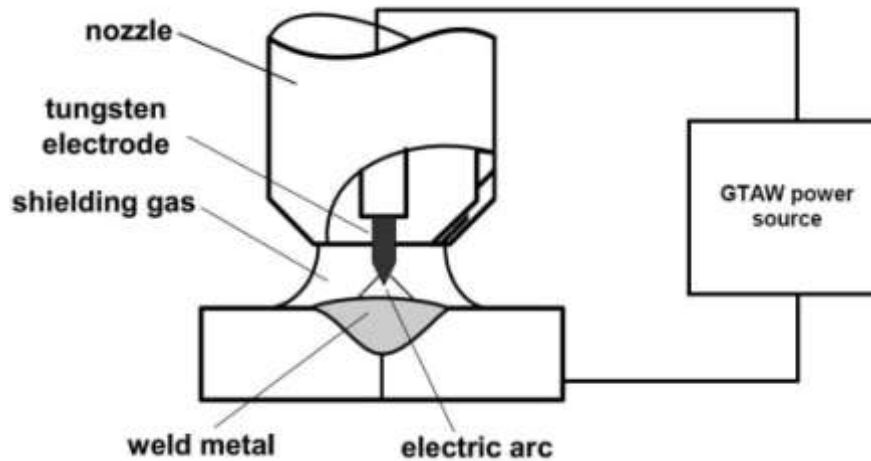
Autogenous Gas Tungsten Arc Welding (GTAW) process representation (Adapted from[12]).
